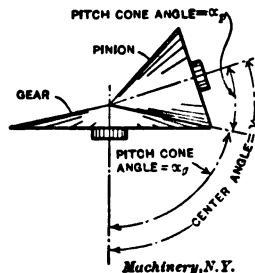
Pitch Cones of Gears Shown in Fig. 1
